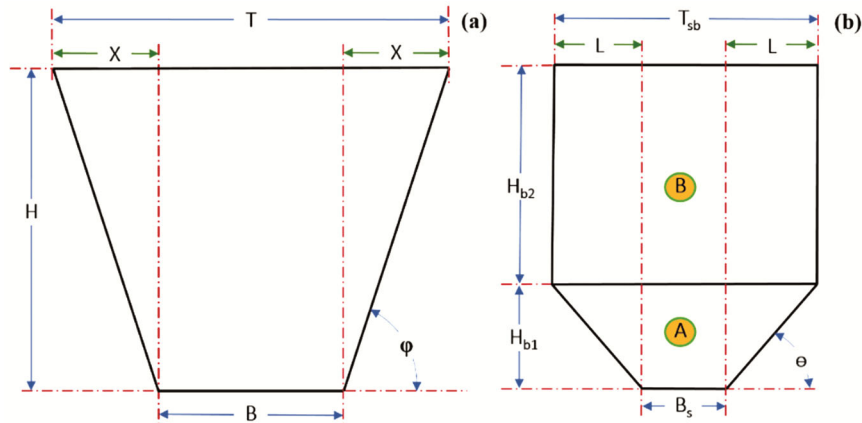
A sectional view (a) soil hopper, and (b) seed box
